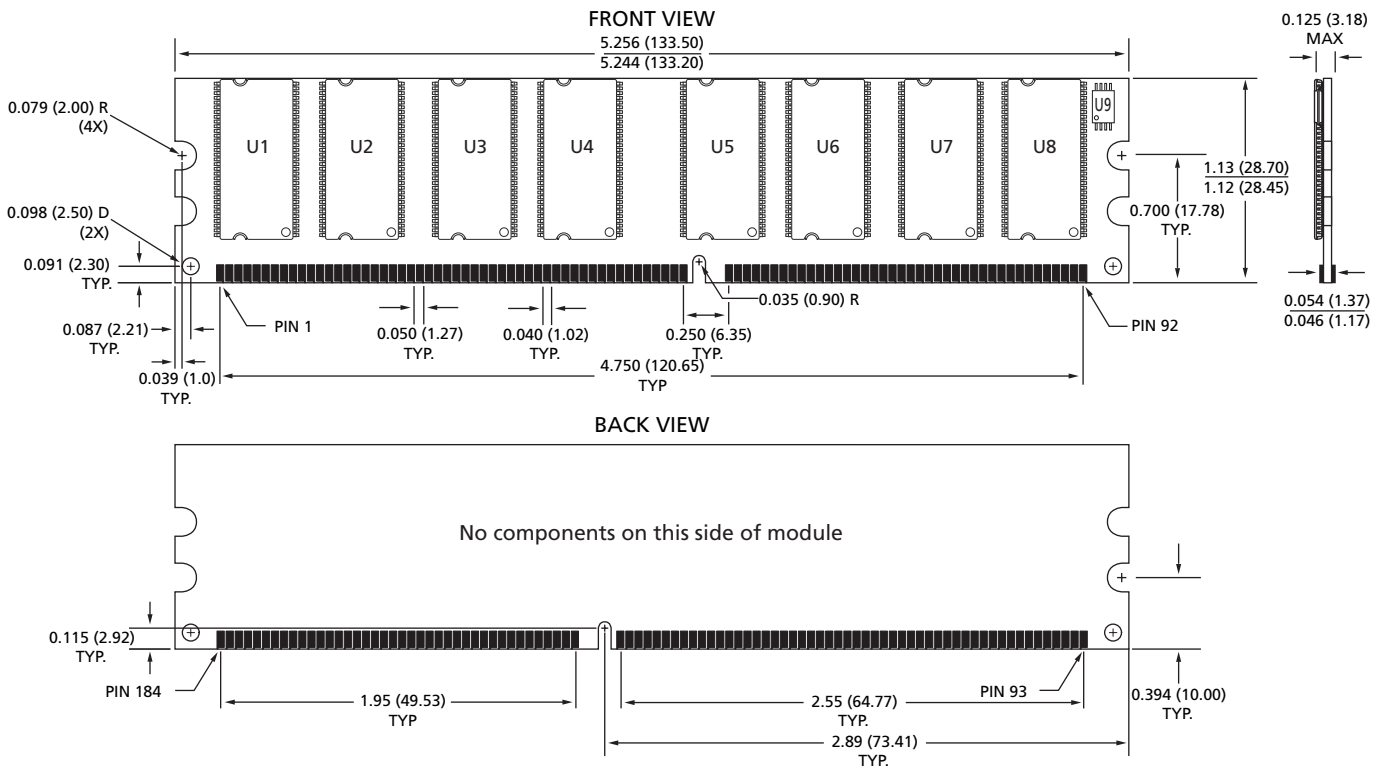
184-Pin DIMM Dimensions – Low-Profile PCB
